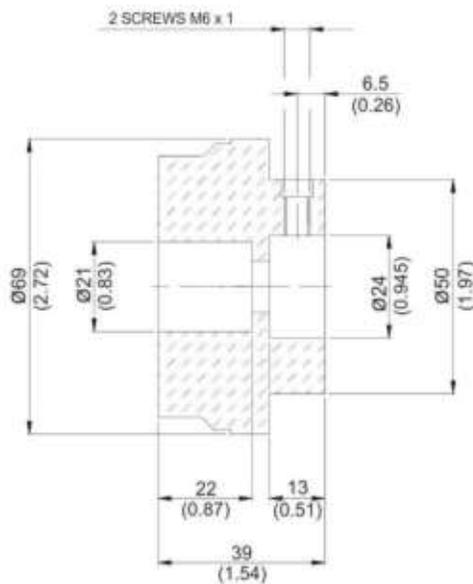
TP290 Dimensional Drawing / Magnets Dimensional Drawing
